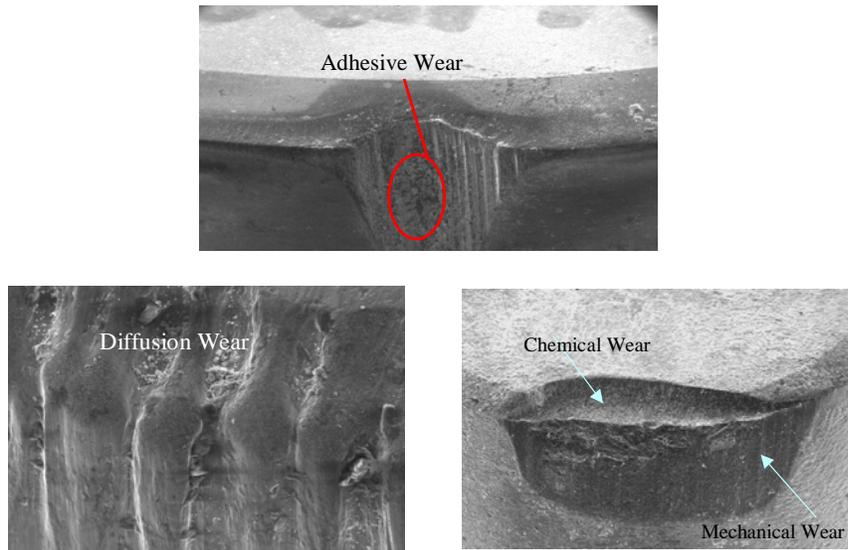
Adhesive wear (top) on the front of the cutting edge, diffusion wear pattern (bottom left), and chemical and mechanical wear (bottom right) at the cutting edge of PCBN observed in standard turning tests.
